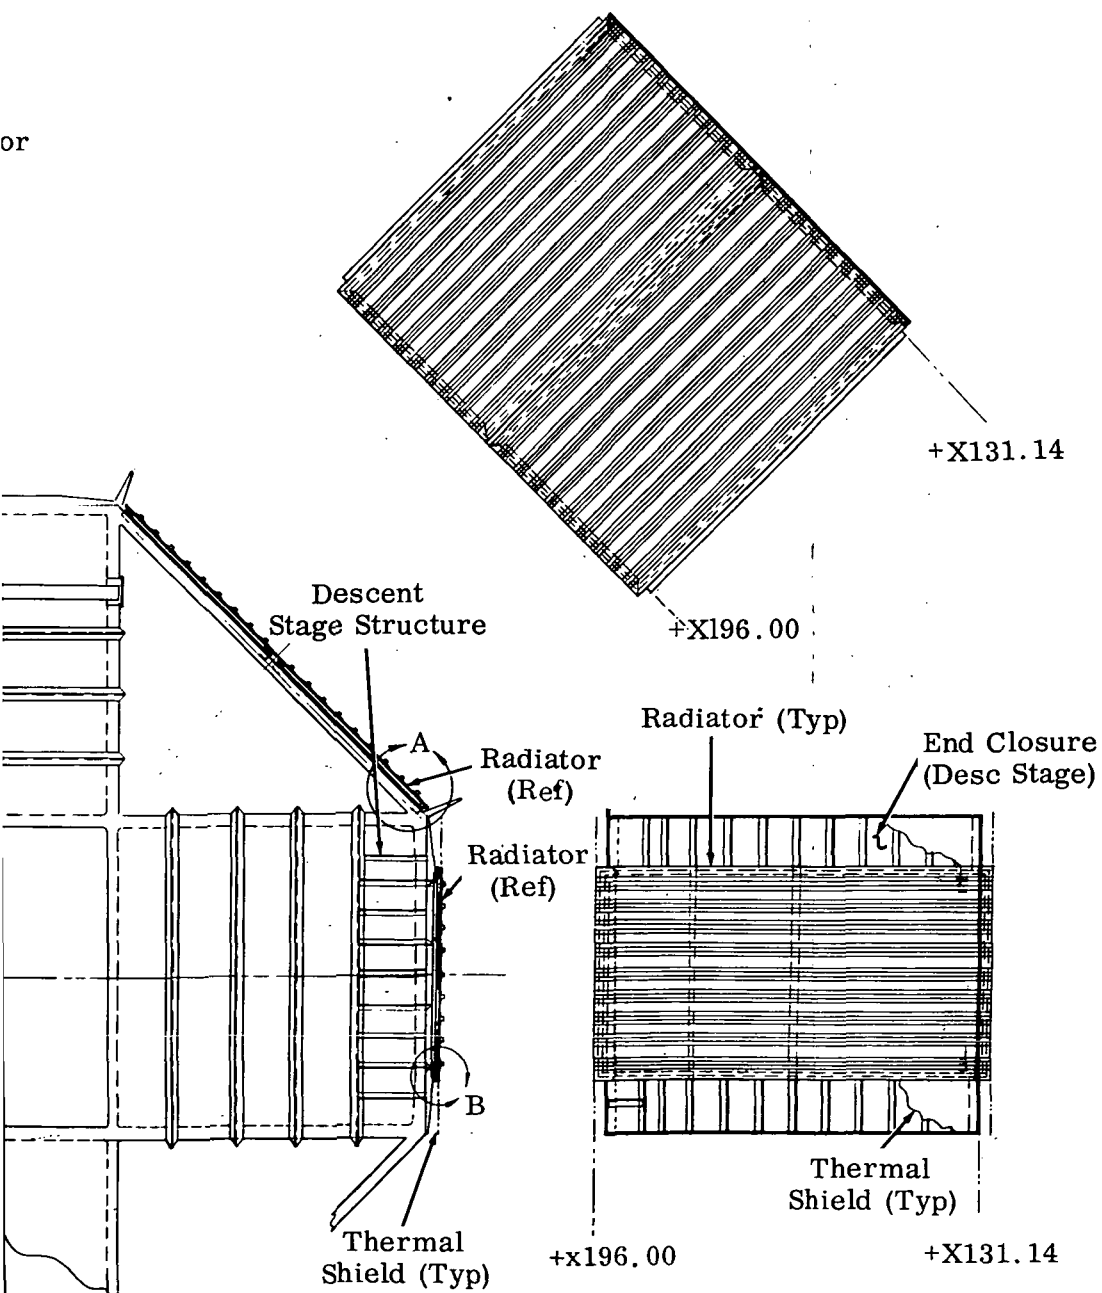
Recommended Cryogenic Tank Installation Structural Arrangement Phase II Lab
